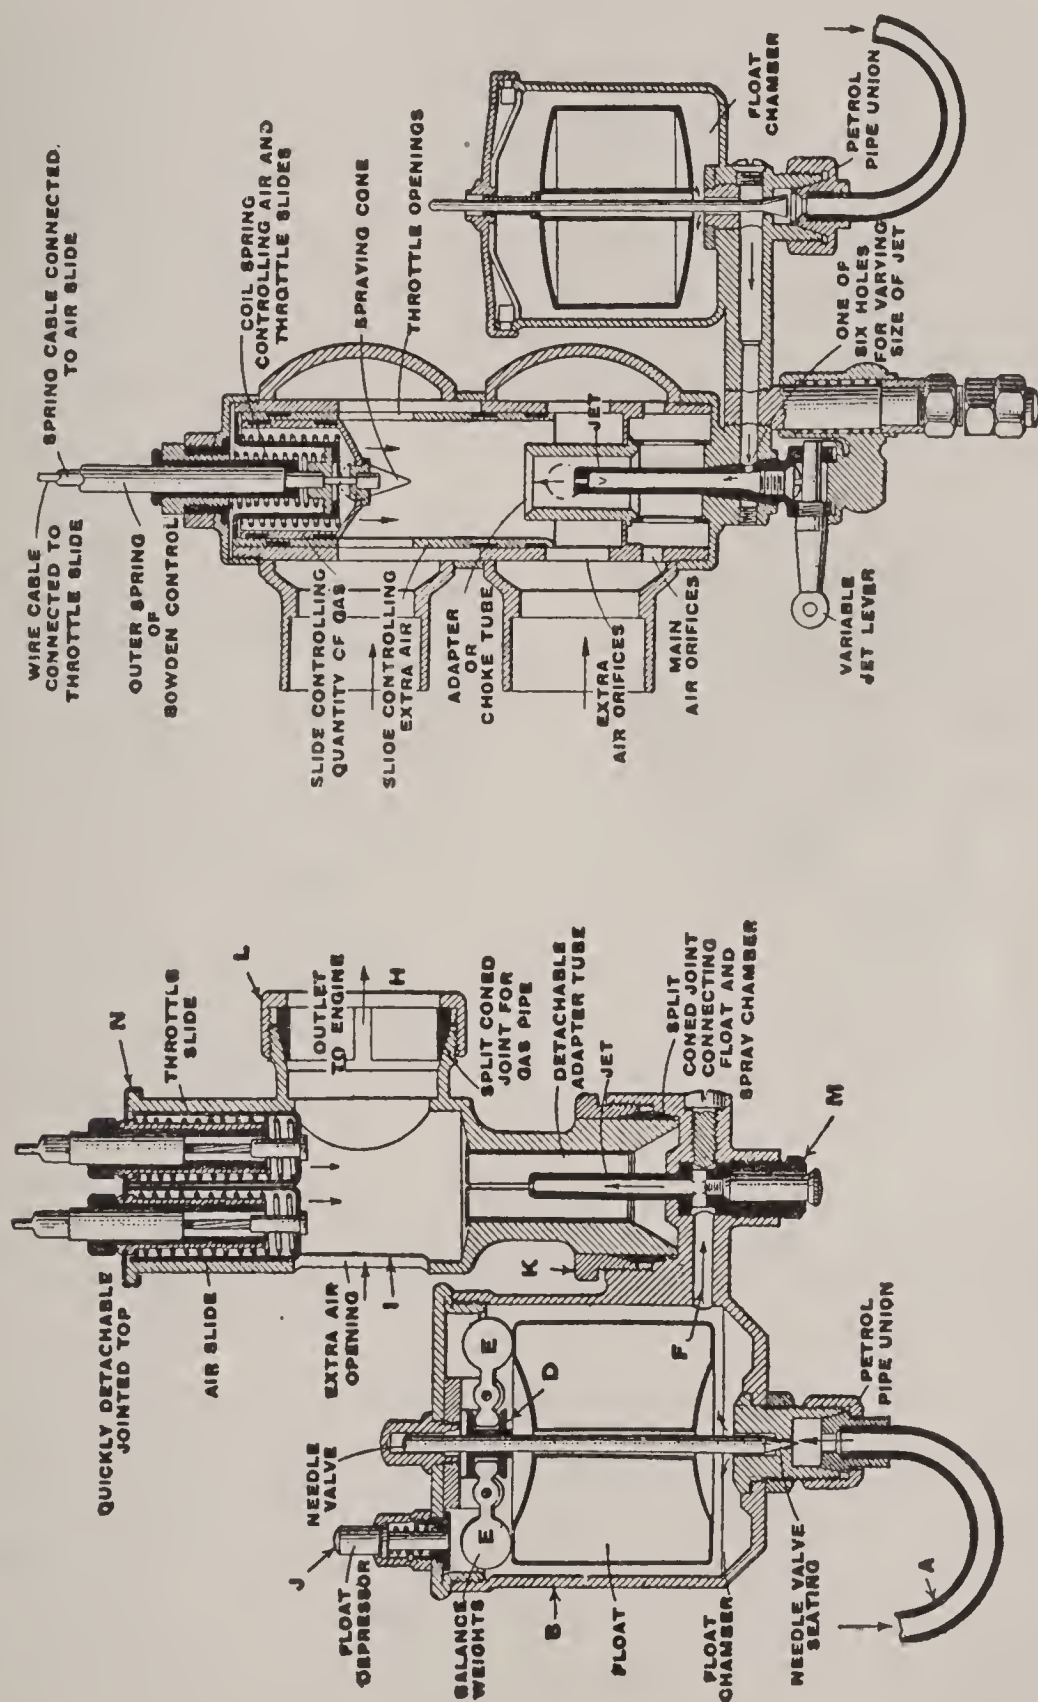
Sectional Views of Typical English Carburetors, Showing the Placing of the Float Chamber at One Side of the Mixing Chamber and the Air Regulation by Hand Operated Valves.
